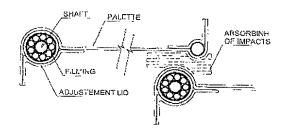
PLATE WITH SPINDLE BEARING FIXED TO THE VANE
